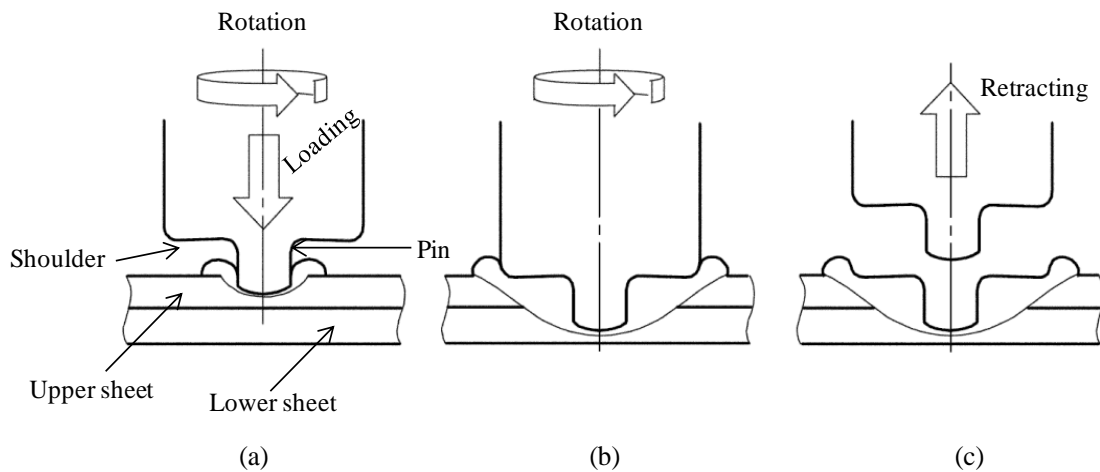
Schematic illustration of FSSW: (a) Plunging, (b) Rotating, (c) Drawing out.
